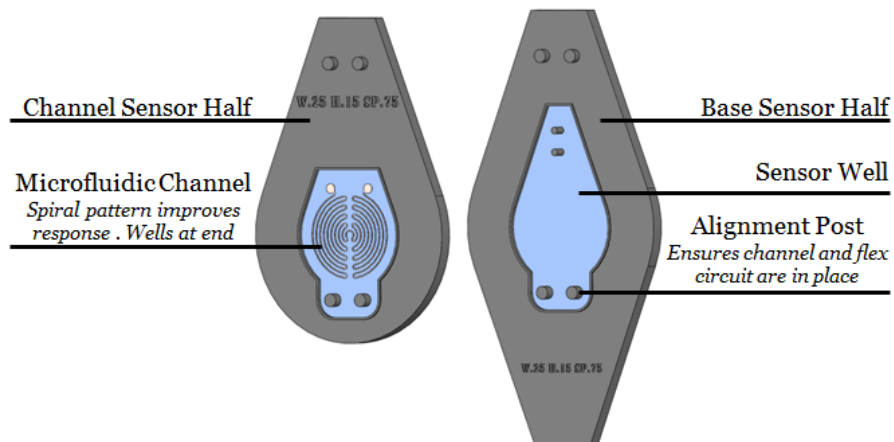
Sensor molds components and features. Two sensor halves are 3D printed with a well into which elastomer is poured. The channel half has the positive of the microfluidic channel and sensor wells. The base is printed with alignment posts to ensure proper construction.
